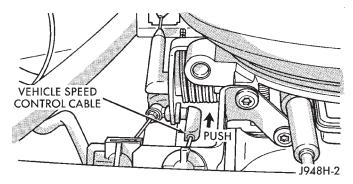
Cable at Bell Crank—5.2L V-8 Engine
